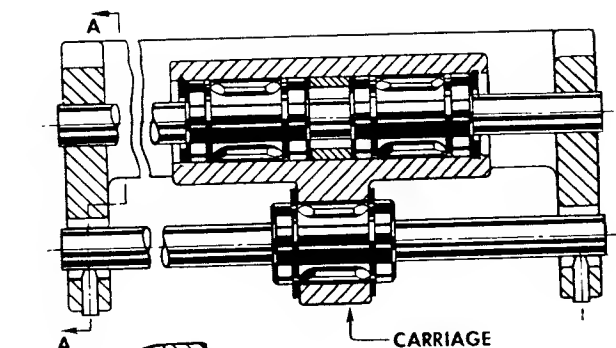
PARALLEL SHAFTS WITH ADJUSTMENT
